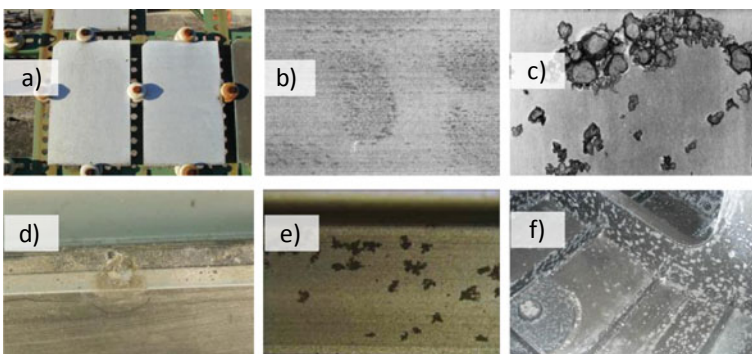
Typical manifestations of corrosion conditions a atmosphere corrosion; b footprint corrosion; c fretting; d acid corrosion; e rinse water corrosion; g pitting; (<http://www.defects.qualanod.net/3.html>; <https://www.amteccorrosion.co.uk/aluminium.html>; Short and Sheasby 1974)
